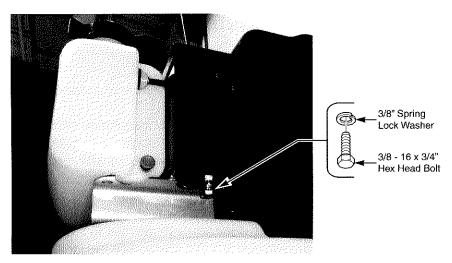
Secure Foamer Unit & Tank to Mounting Bracket
